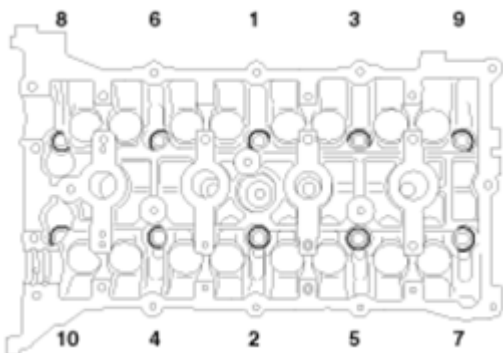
Cylinder Head Gasket Bolts Tightening Sequence
